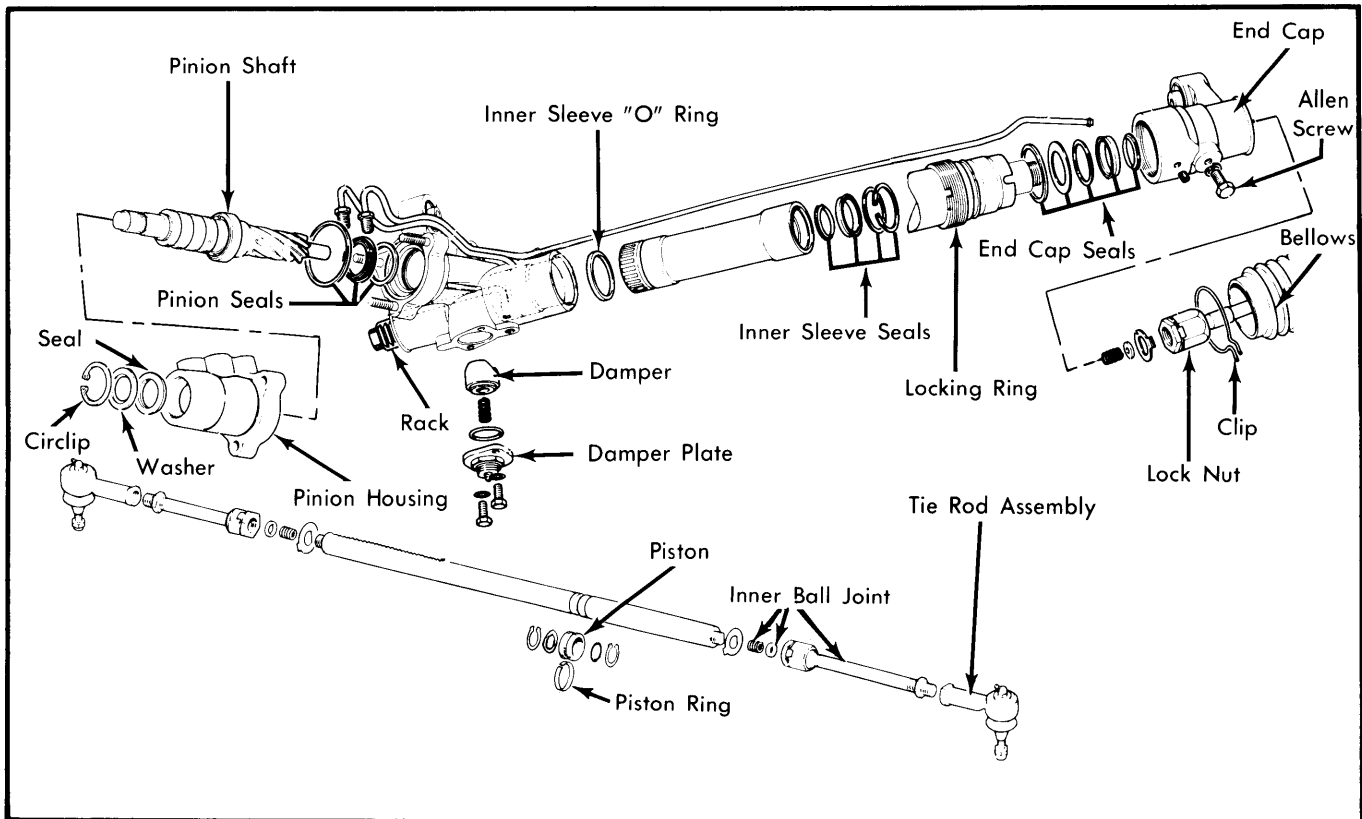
Exploded View of Jaguar Power Assisted Rack and Pinion
